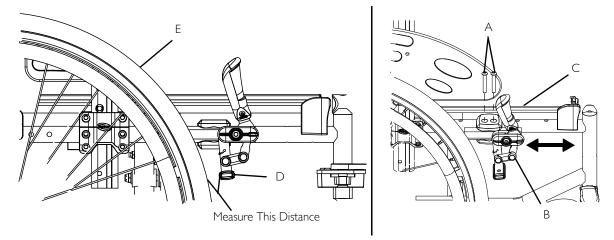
Adjusting Wheel Locks- Adjusting Wheel Lock Tension.
